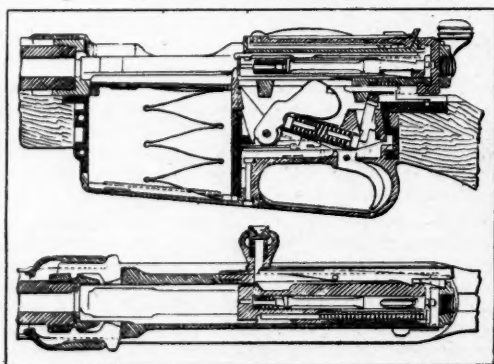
VERTICAL AND HORIZONTAL SECTIONS WITH BREECH OPEN.
